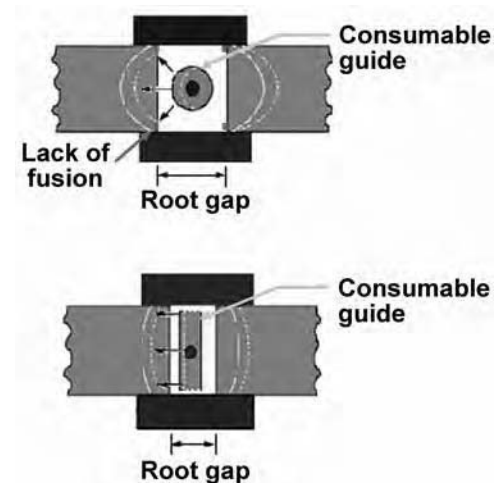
Example of consumable guide designs for a steel plate. (a) Standard type for standard electroslag welding. (b) Sandwich type for narrow-gap improved electroslag welding. Source: Ref 34
